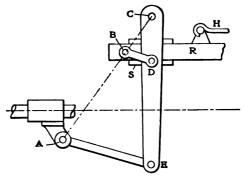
Sliding Type of Parallel Reducing Motion.
